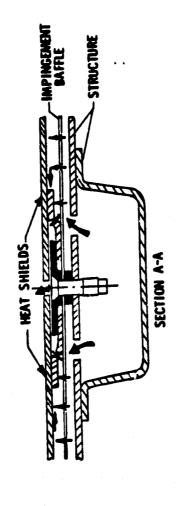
SIDEWALL HEAT SHIELD IMPINGEMENT COOLING
